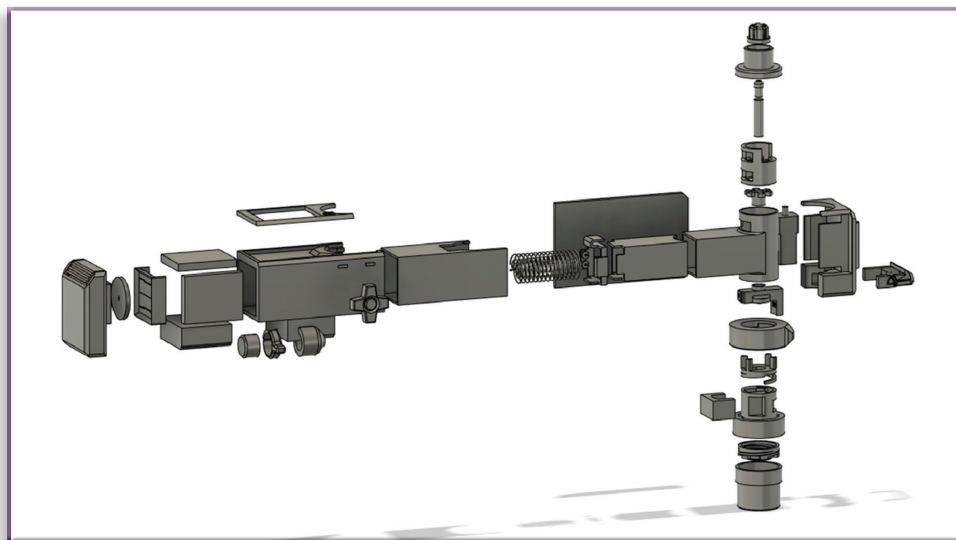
Exploded view STEAM (CAD) illustrating the devices' ability to be disassembled and re-assembled in the pre-hospital environment for cleaning or repair.³⁵
